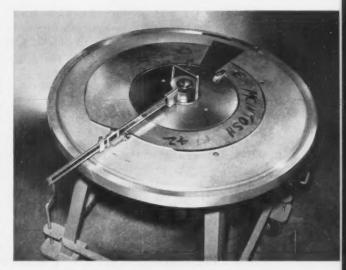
Each segment for a spiral cam is inspected on a fixture to determine its accuracy with respect to the tool drawing.
